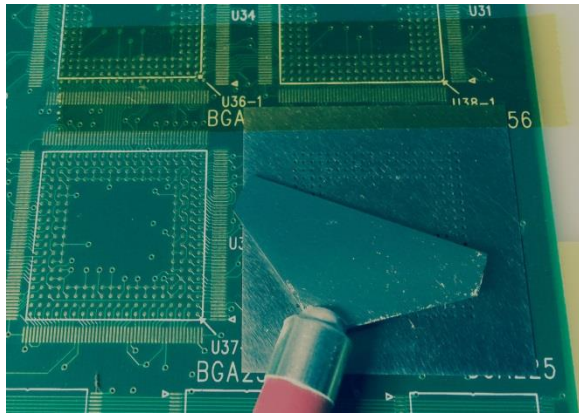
Mini Squeegee used to roll solder paste through rework stencils
